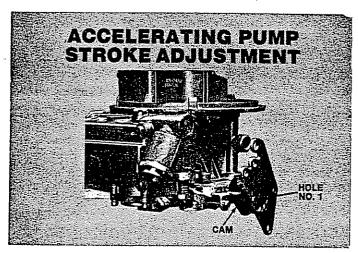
MODEL 2300 ACCELERATING PUMP STROKE ADJUSTMENT
